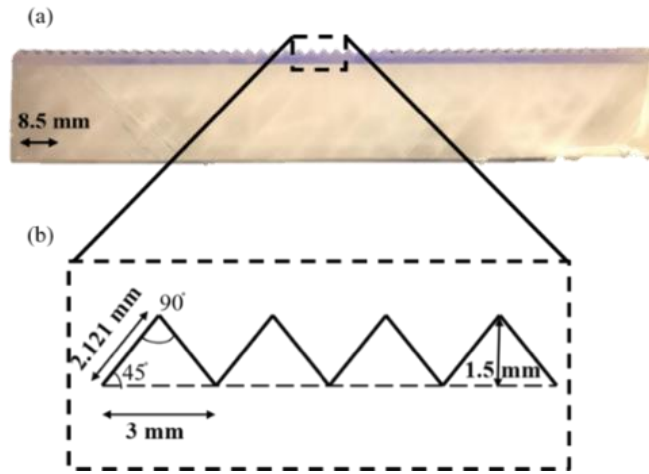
(a) 3D-printed resin mold base; (b) schematic of the sawtooth geometry
